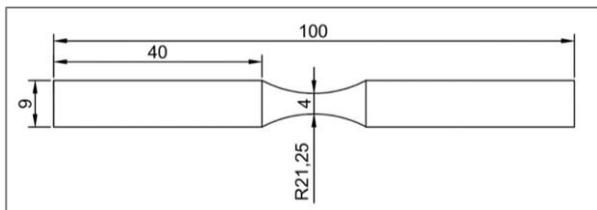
Dimension of fatigue test specimen (all dim. in mm)
